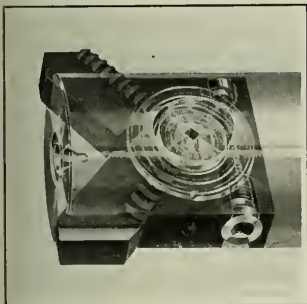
Phantom View, showing Construction of the Angle-type Cutter
